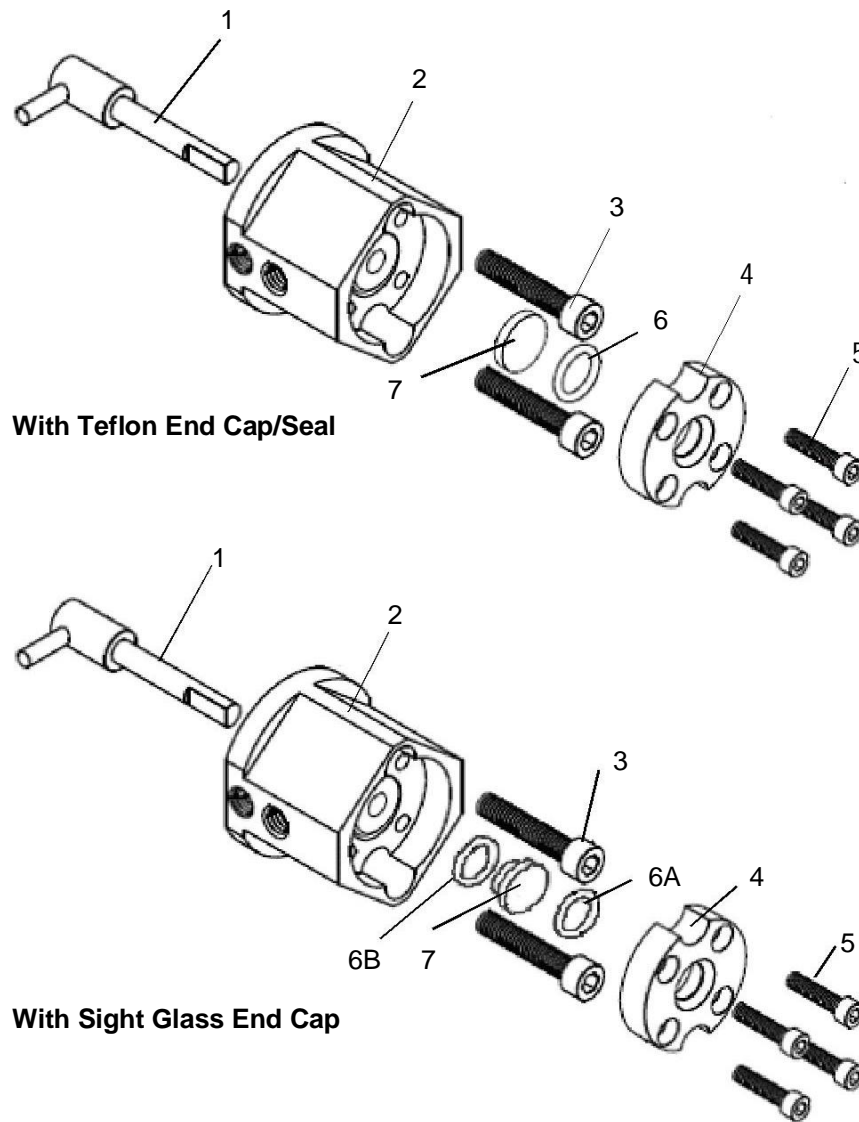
Micro Rotary Pump Module Components Assembly/Disassembly
